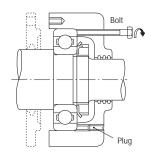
Removal of Outer Ring with Dismounting Bolts
